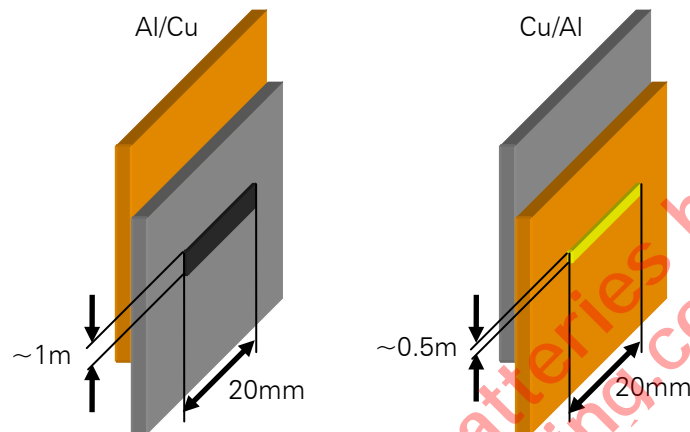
Samples and weld seam geometry for the temperature shock test and also the tensile tests.
